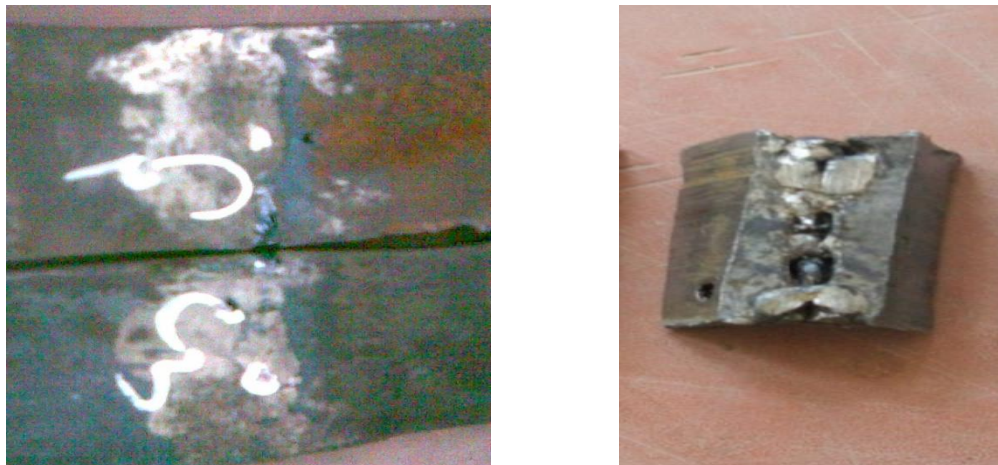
Sample with holes after test Fig. 18 Section of tested sample with partial weld fill
